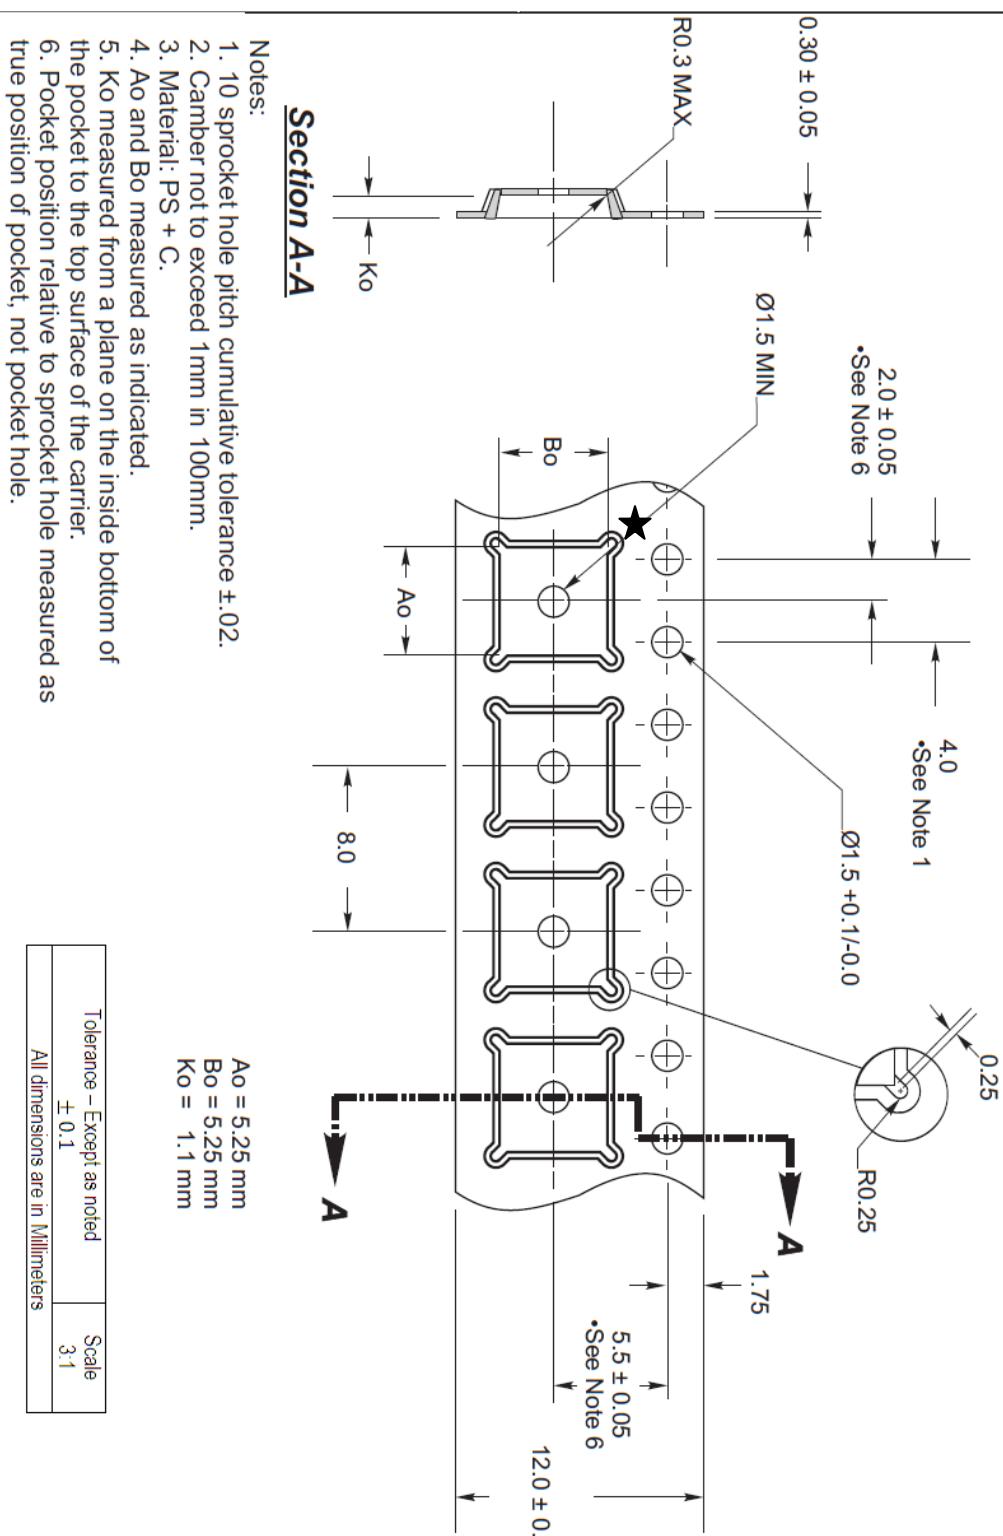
FT232RQ and FT245RQ Tape Dimensions
